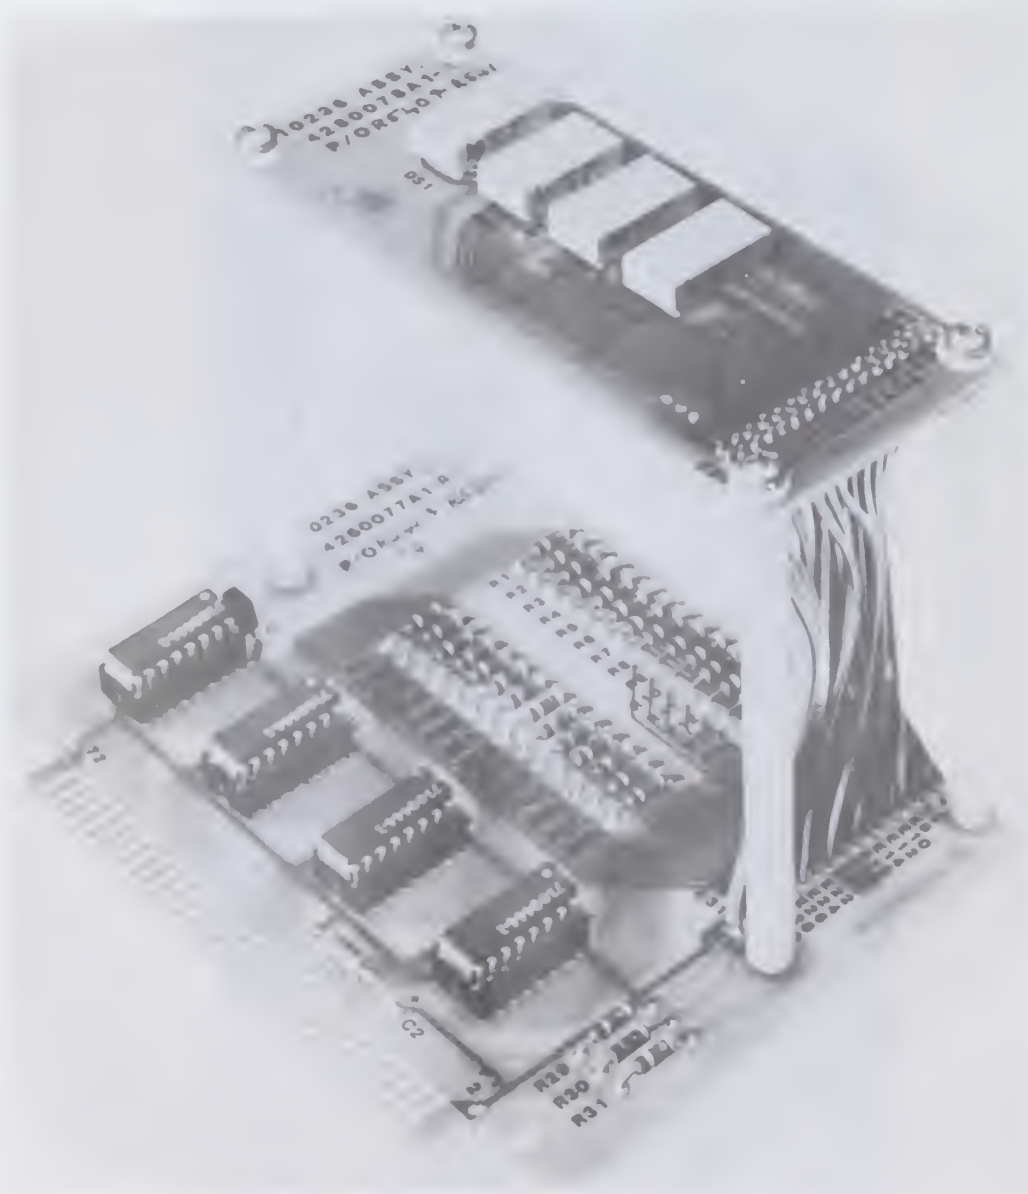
Display Mounting Board Assembly, Parts Location (photo)
